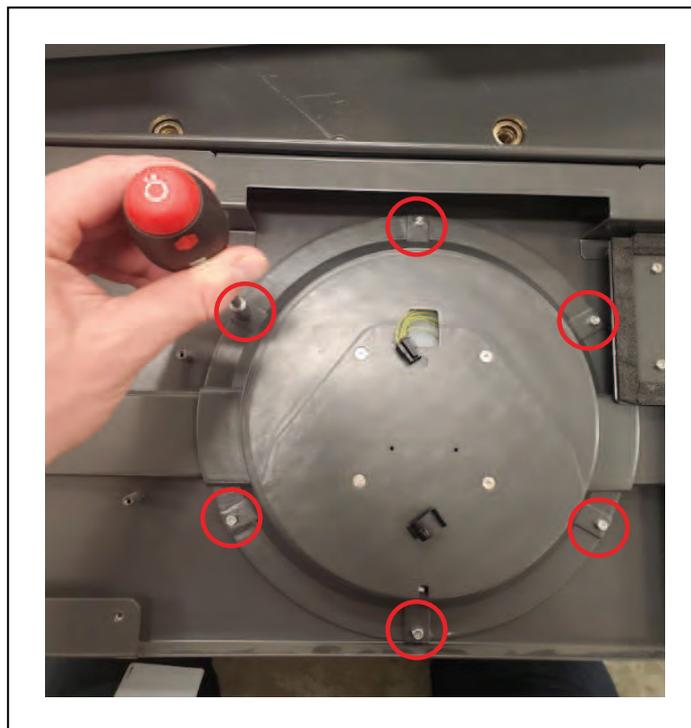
Removing Four Screws Holding the (A) Electronics Bay Cover Seal
